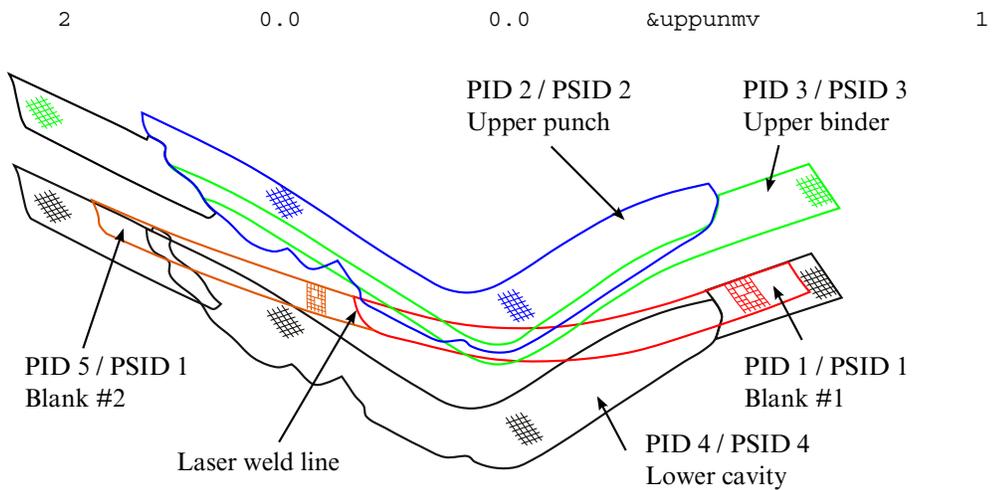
A tailer welded blank is positioned in a decklid (toggle draw).
